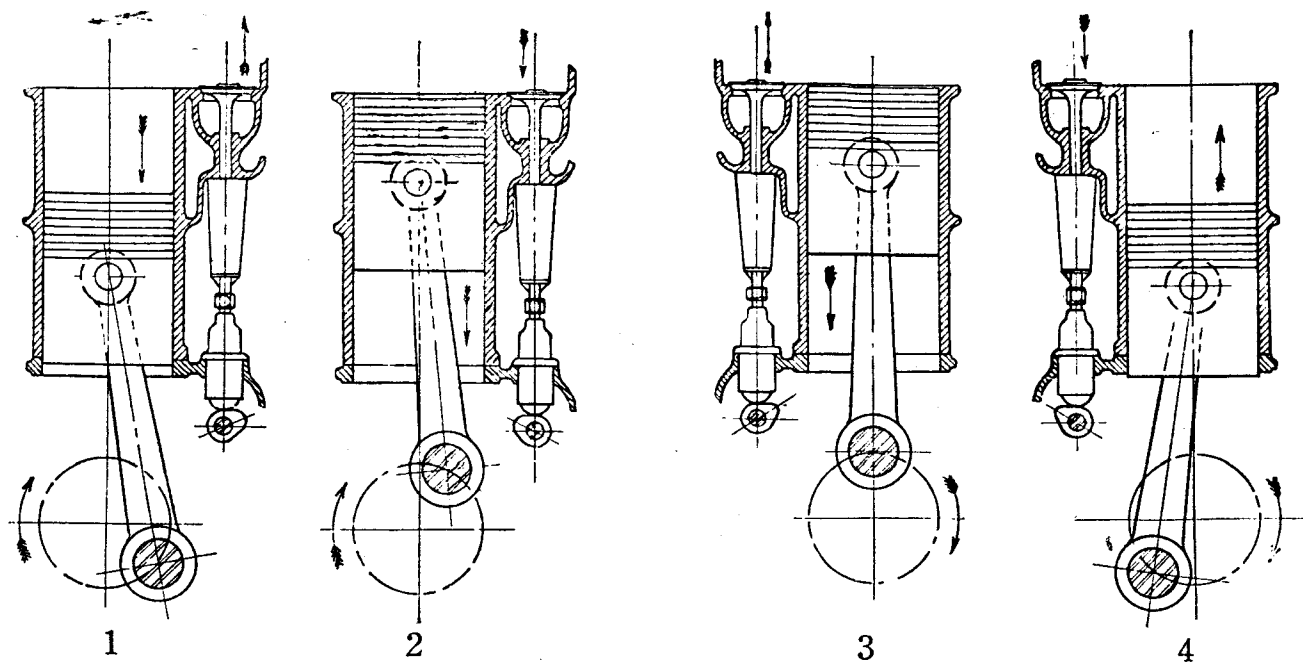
VALVE TIMING "R6" AND "M6" ENGINES
